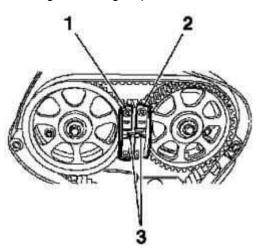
Installing camshaft star: 1 - a special tool, 2 - a special tool, 3 - tags
